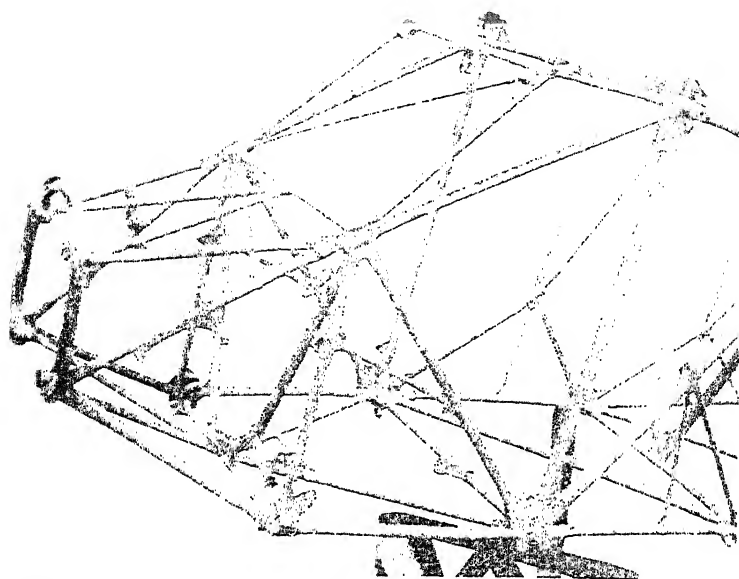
CURTISS "THRUSH"—ENGINE MOUNTING AND FRONT END OF FUSELAGE
